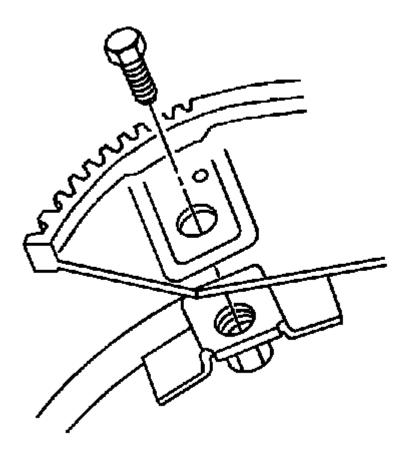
Flywheel-To-Torque Converter Bolts Courtesy of GENERAL MOTORS CORP.
